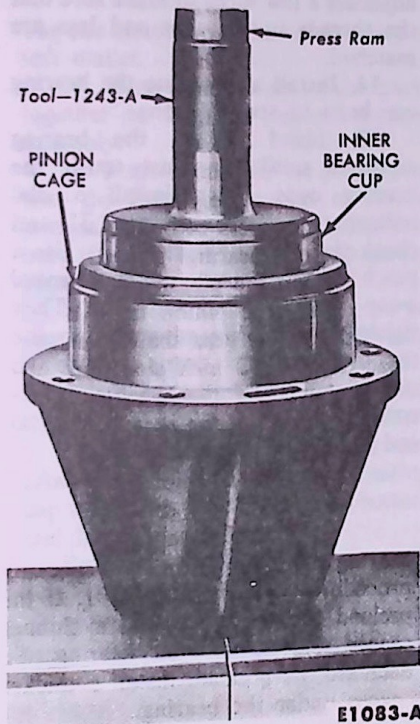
Installing Hypoid Pinion Rear Bearing Cup
